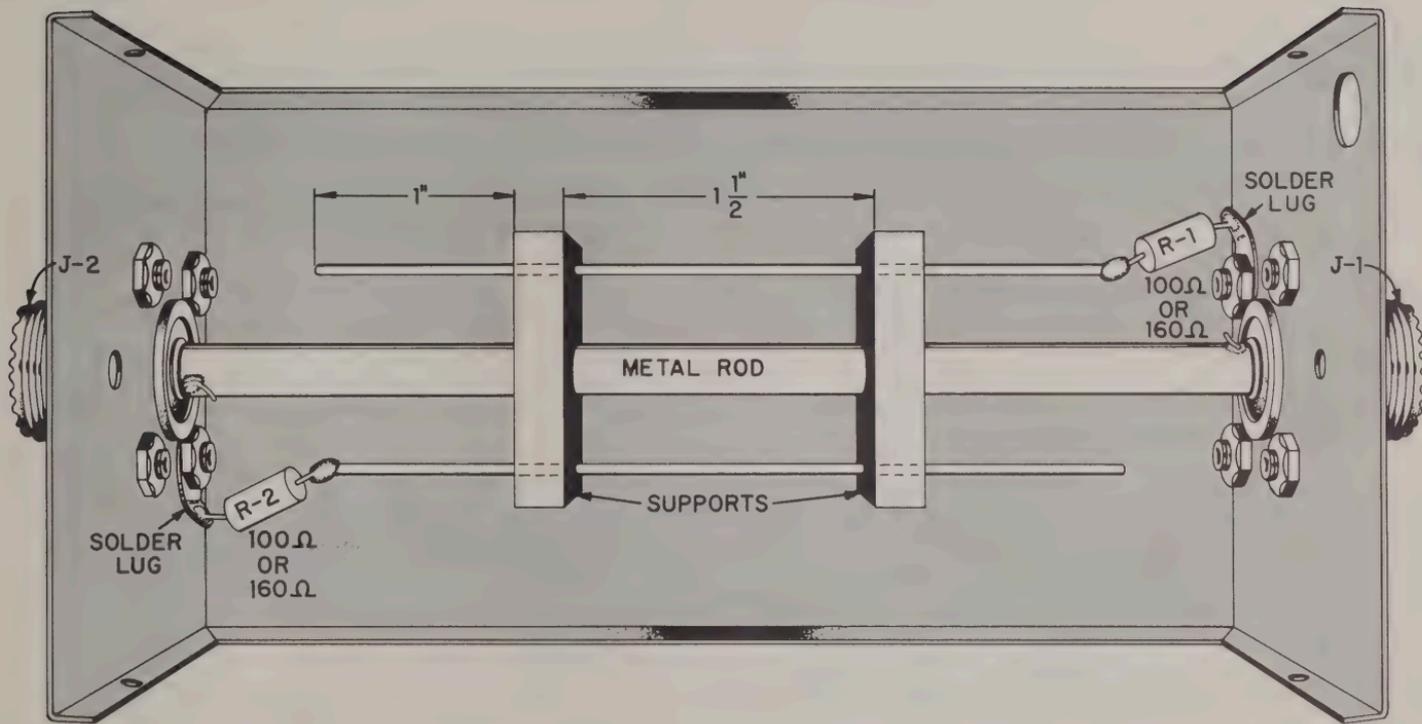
MOUNTING PARTS ON THE PICK-UP CHASSIS
